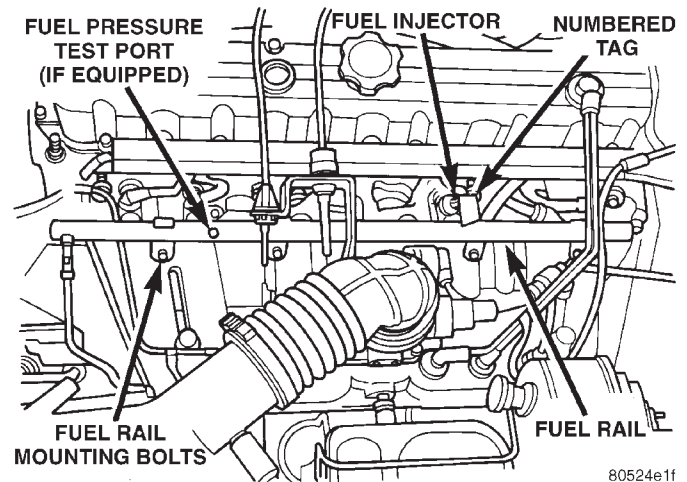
Fuel Pressure Test Port—4.0L Engine
